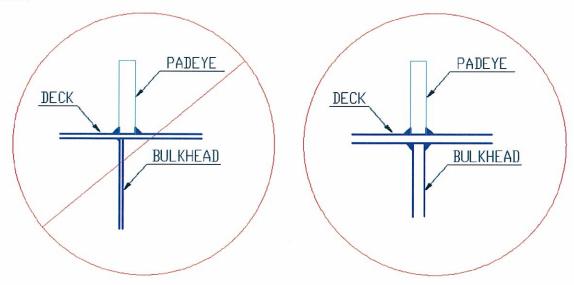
Padeye Alignment, Welding, and Transitions to Block Structure
